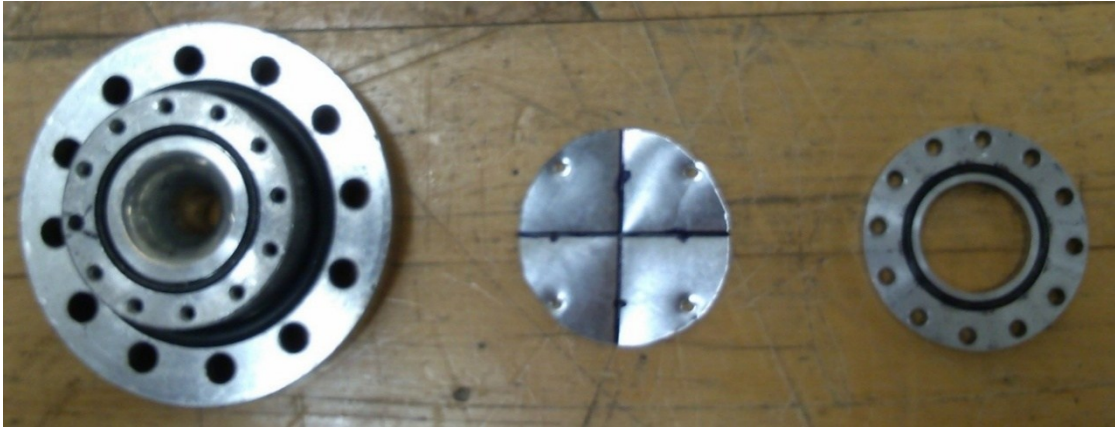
5 Nozzle insert assembly: nozzle insert, diaphragm and nozzle plate (from left)
